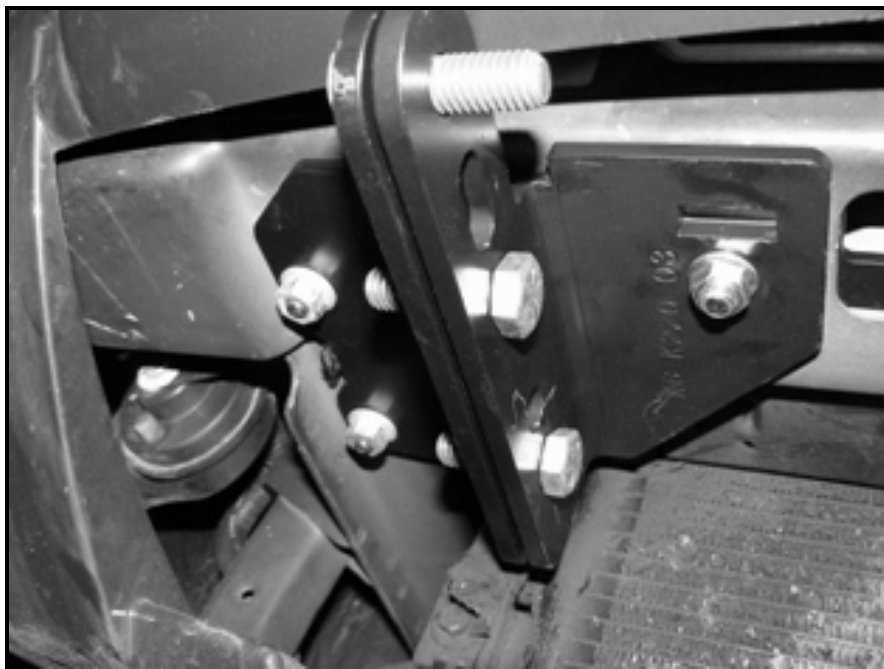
Passenger-side view showing location of outside (left) and inside mounting brackets (right).
